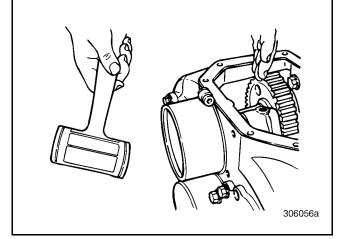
Tapping Piston into Place to Align Locking Bolt Hole
